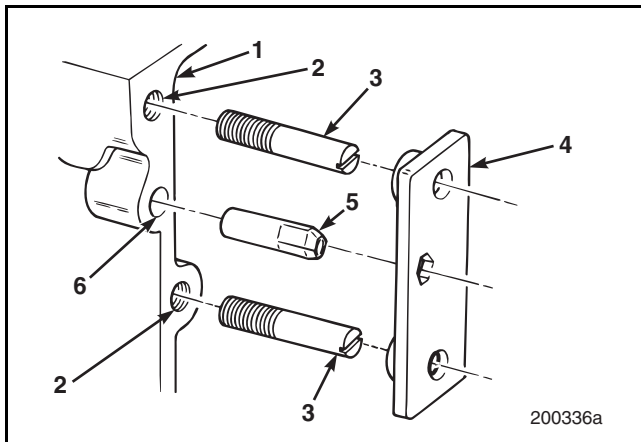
Diamond-Shaped Dowel Pin Installation
